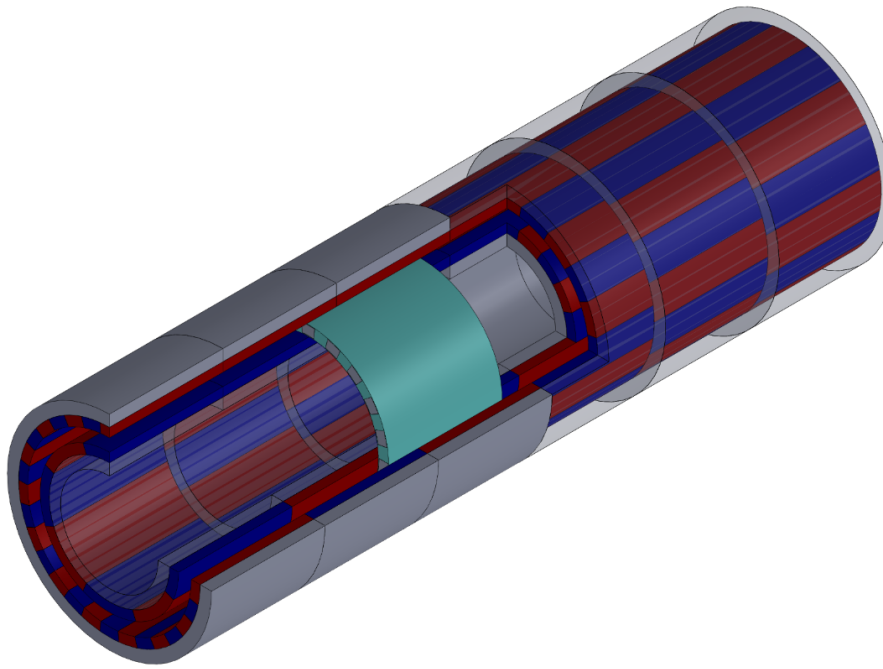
Magnetic gearbox solution with a moving carrier.
